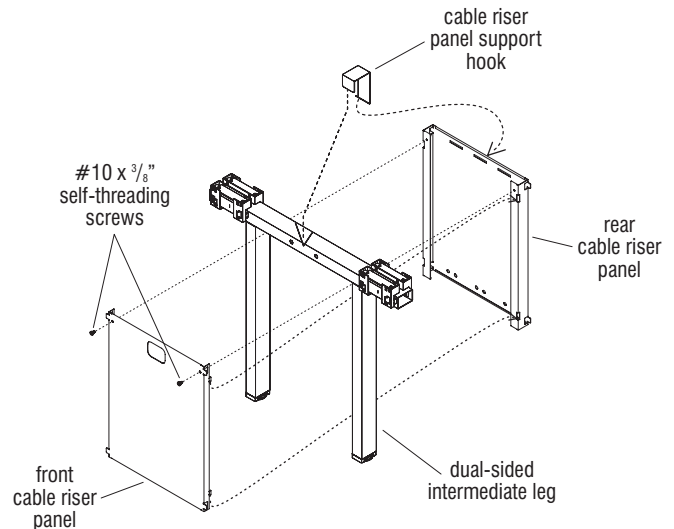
Dual-Sided Benching - Adder Leg with Cable Riser
